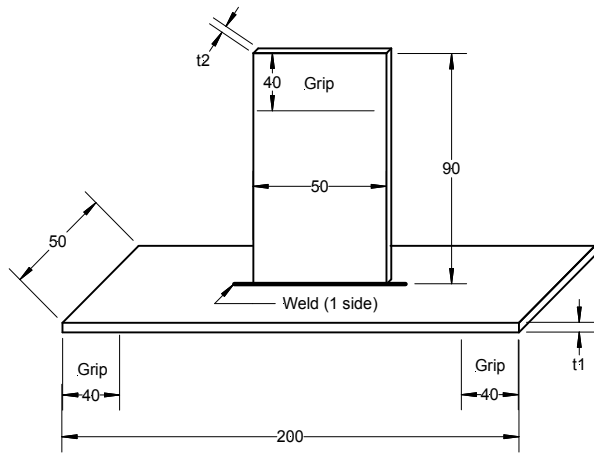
MIG-Welded Perch Mount Specimen
